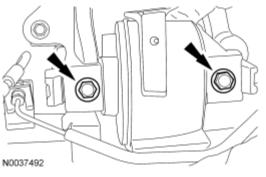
Locating Transaxle Mount Bolts Courtesy of FORD MOTOR CO.
